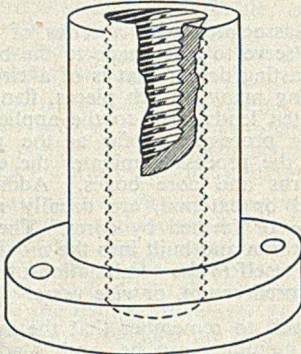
MILD-STEEL INSERT FOR PATTERN BOARD.
